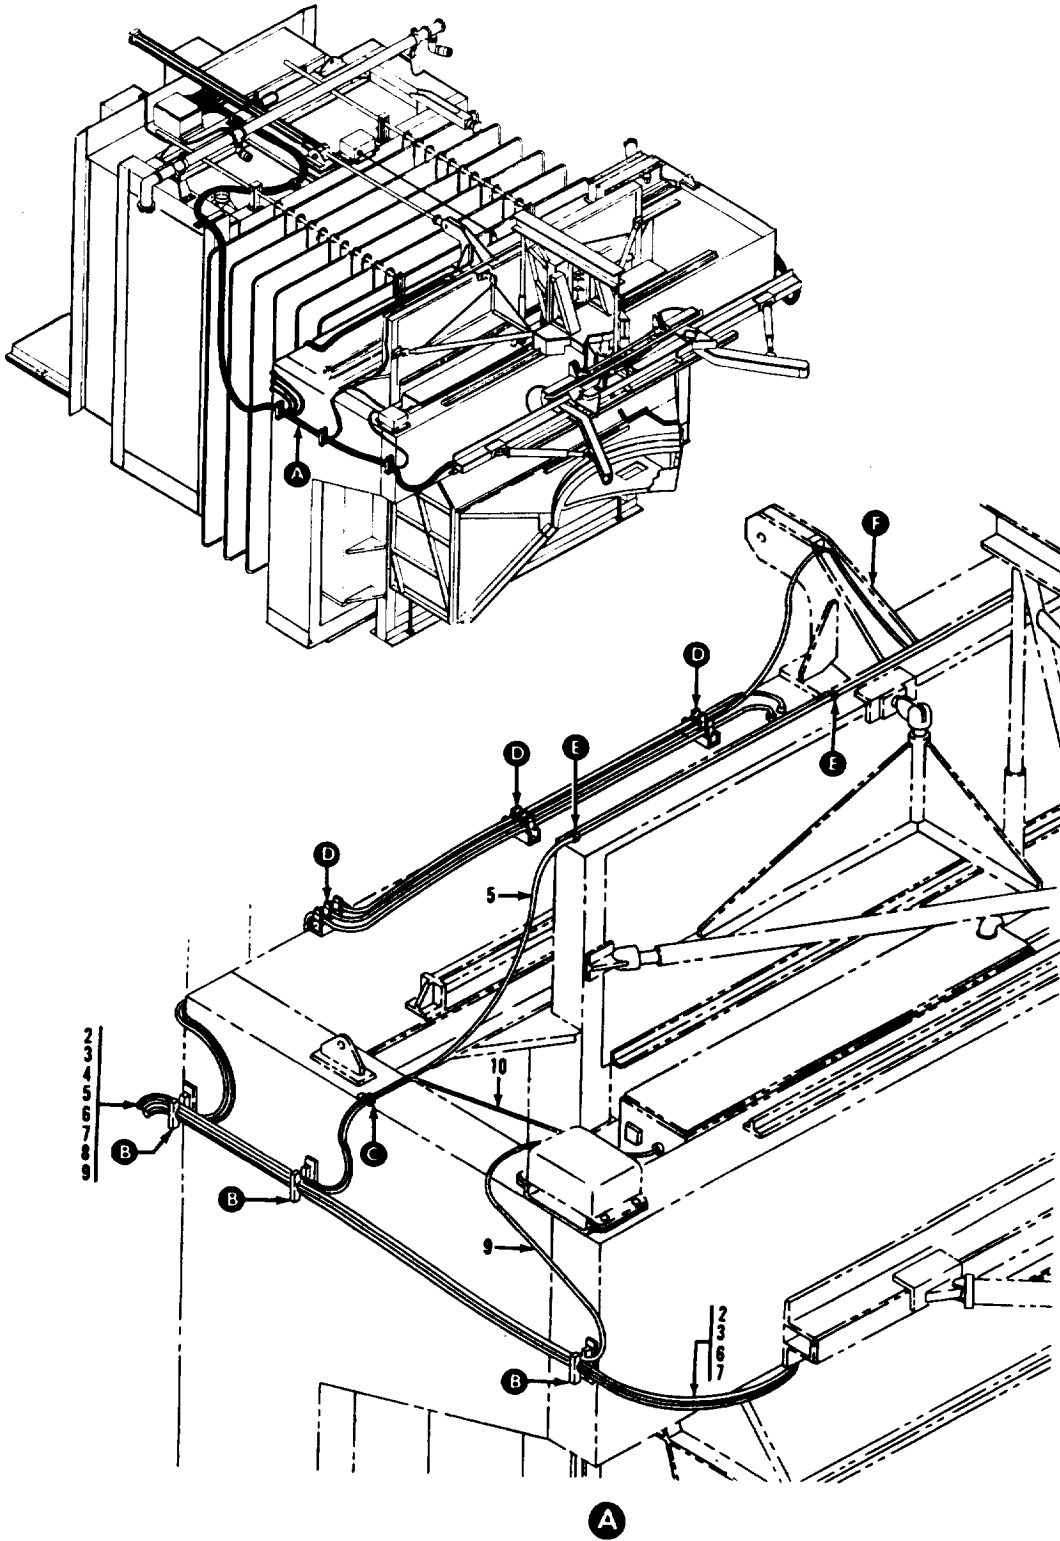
Electrical Equipment Installation (Sheet 2 of 19)
